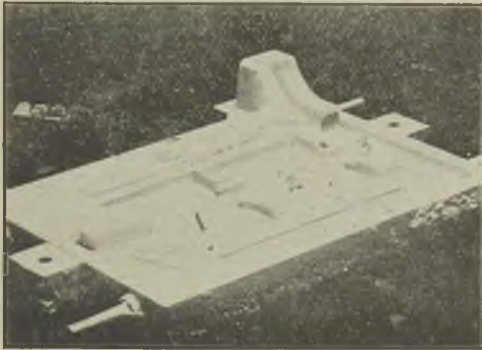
MOTOR CRANK CASE. BOTTOM PART.
